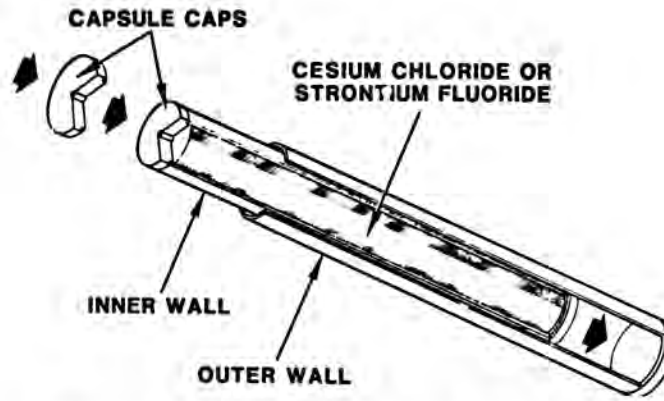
Cutaway Sketch of Typical WESF Capsule
